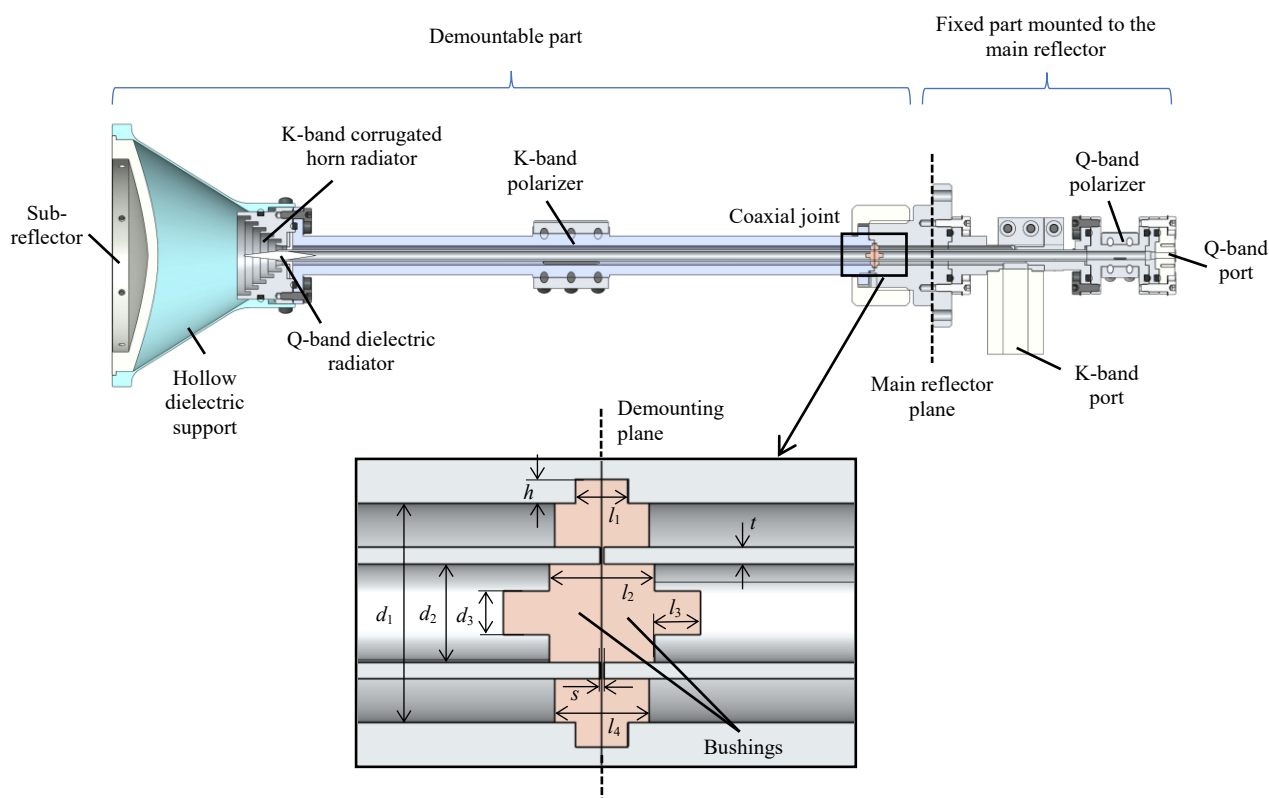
Demountable coaxial feed cross-section. Coaxial joint is shown in details.
